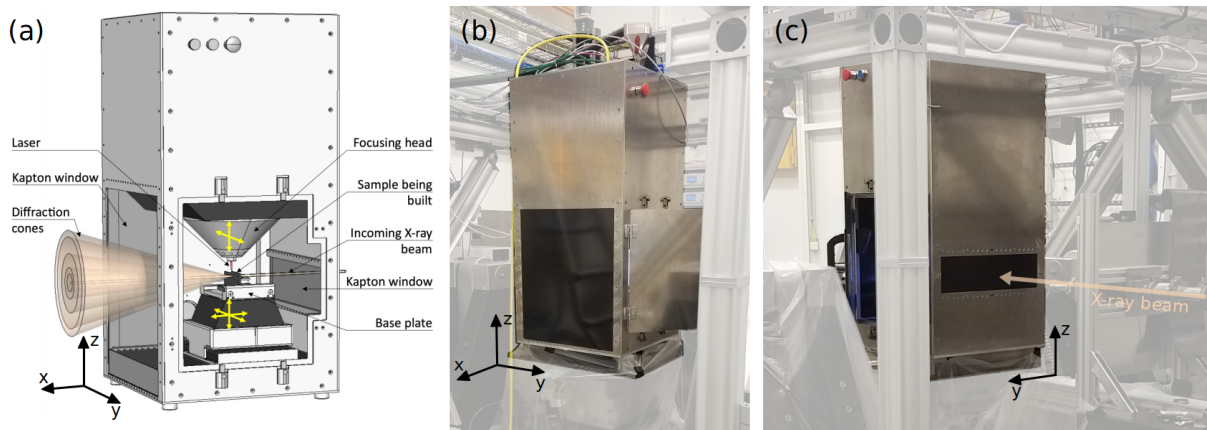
(a) A perspective view of the machine showing a wall sample being built as well as the direction of the incoming and diffracted X-ray beam and (b and c) pictures of the mini-LMD machine installed at the P21.2 beamline.
